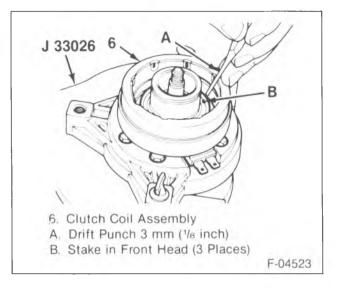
Staking the Clutch Coil Assembly to the Coil Head
